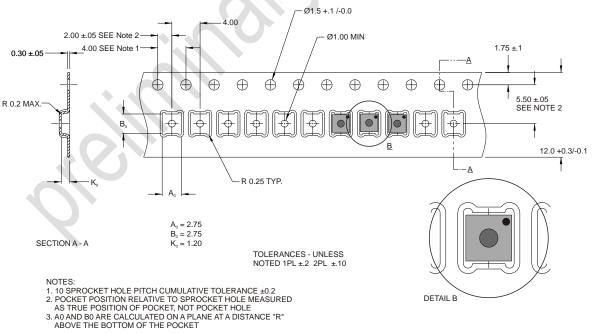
Technical drawing of the packaging tape with sensor orientation in tape. Header tape is to the right and trailer tape to the left on this drawing. Dimensions are given in millimeters.
